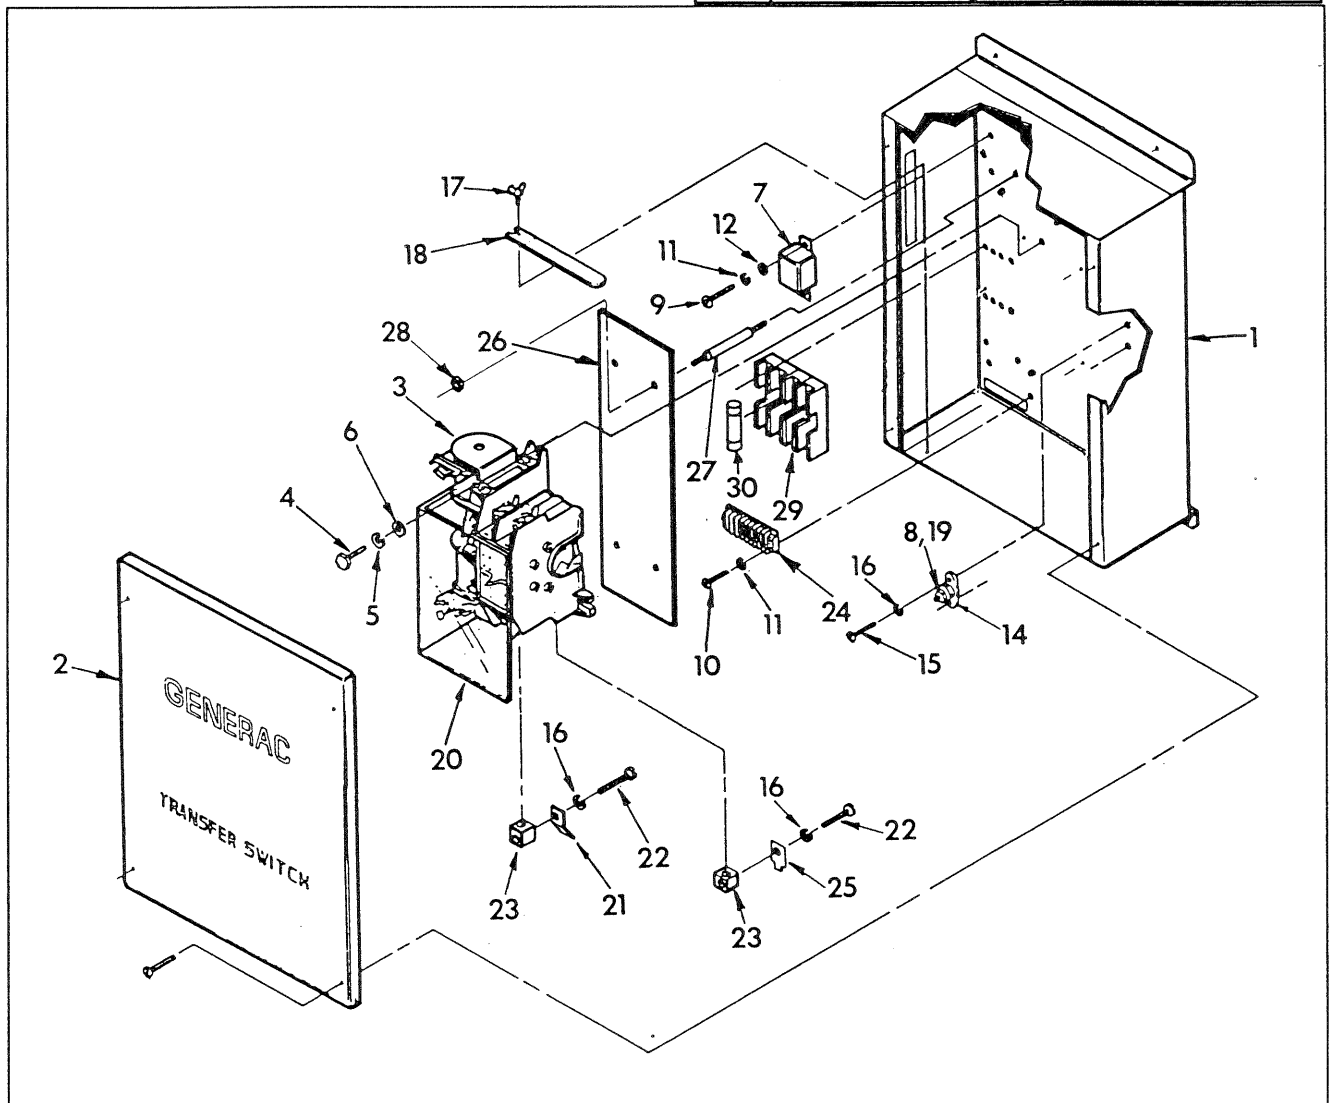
Exploded View of V-Type Prepackaged Transfer Switch
